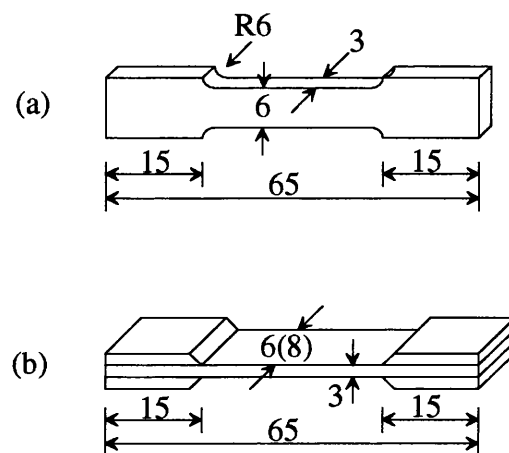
Tensile test piece dimensions, (a) unreinforced, (b) composite.
